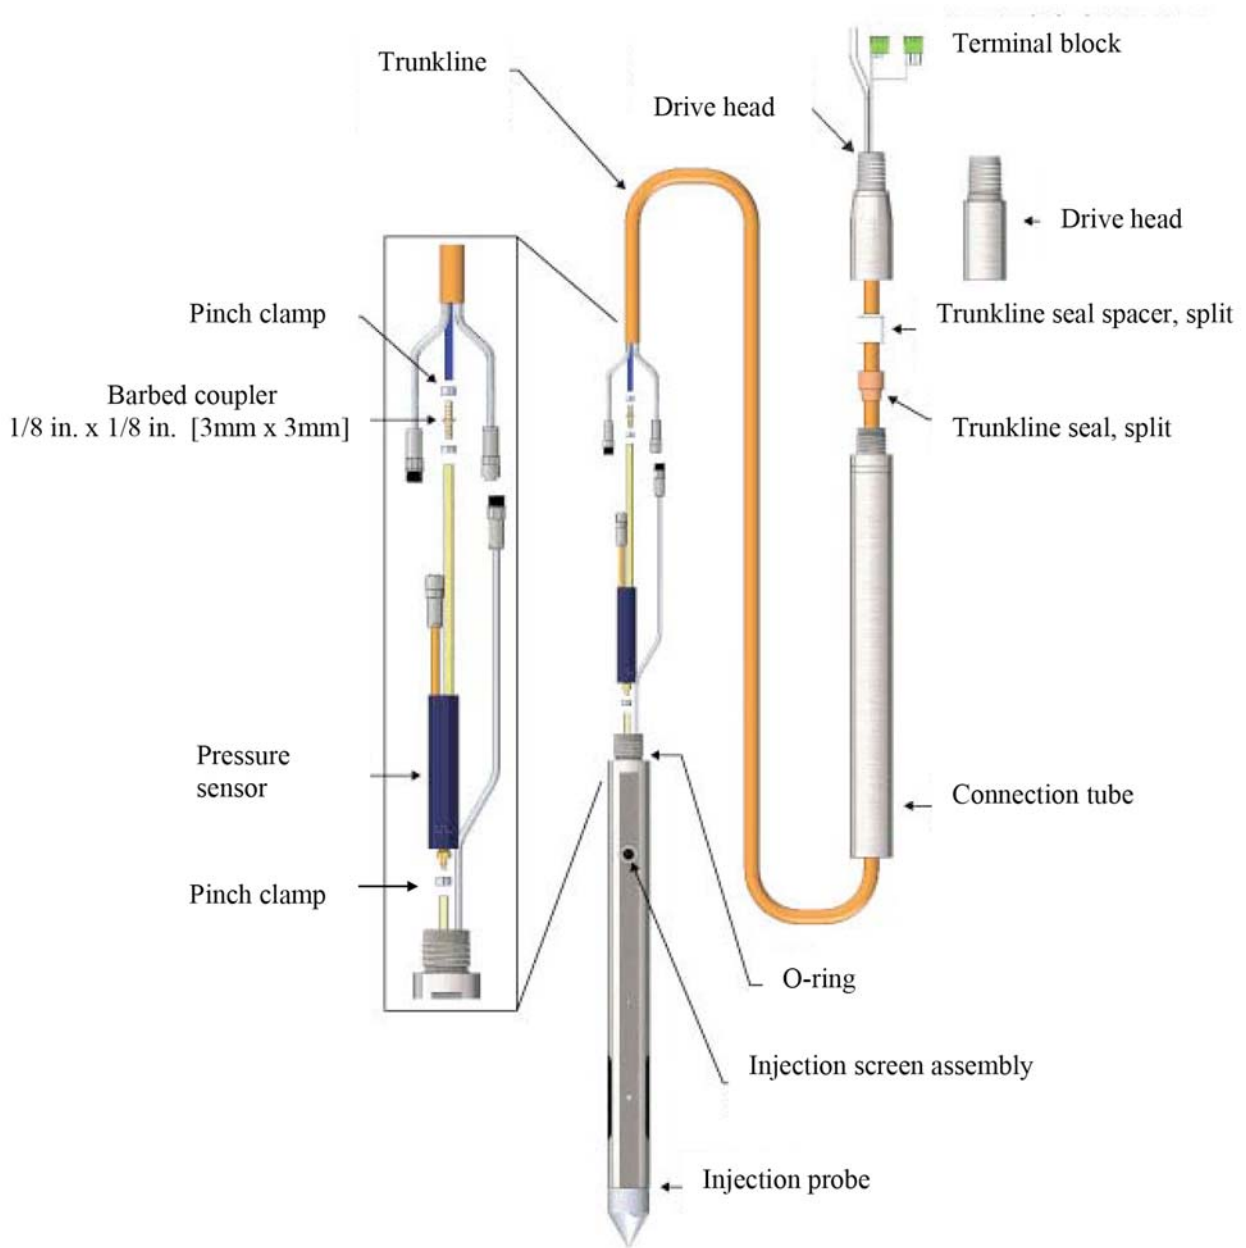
Assembly of an Injection Logging Probe and Attachment to the Trunkline
